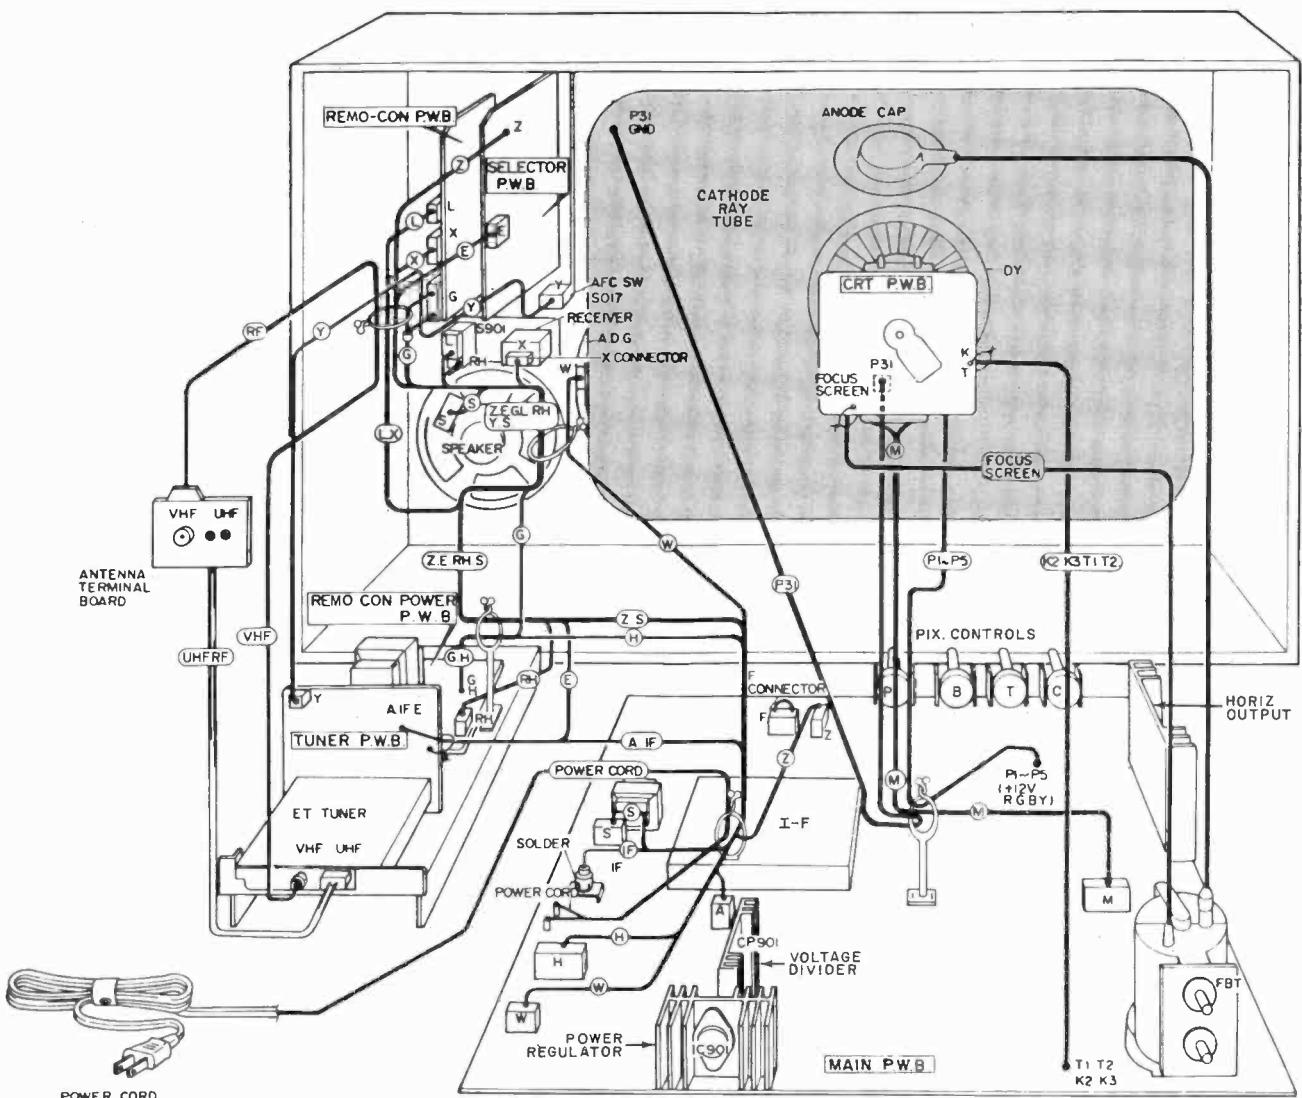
Rear view of the CI1306 showing approximate location and wiring of major components and chassis.
